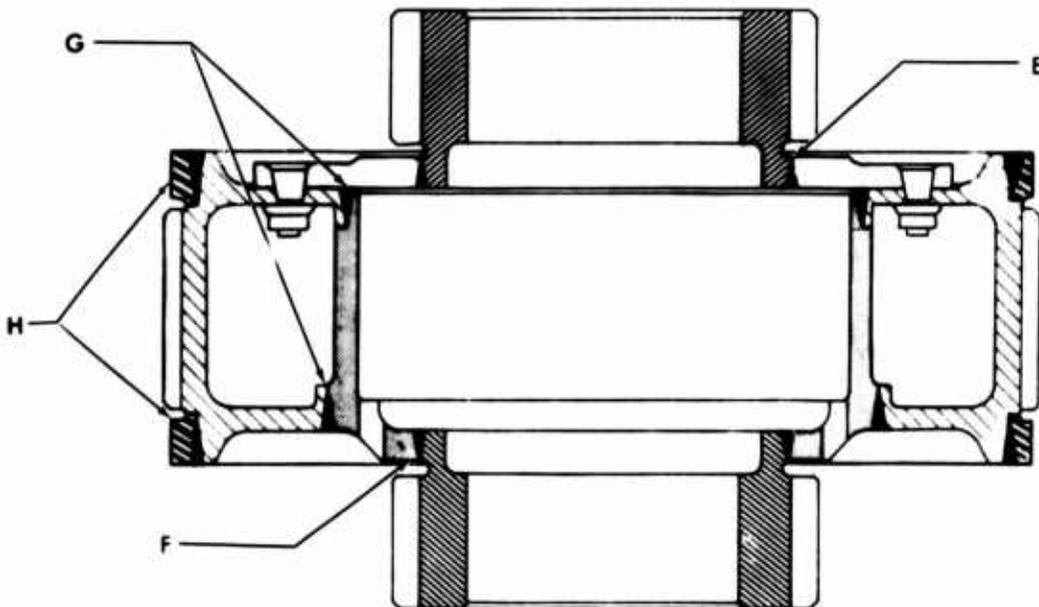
Assembled View of Second-Row Pinion Showing Electron Beam Welds.
